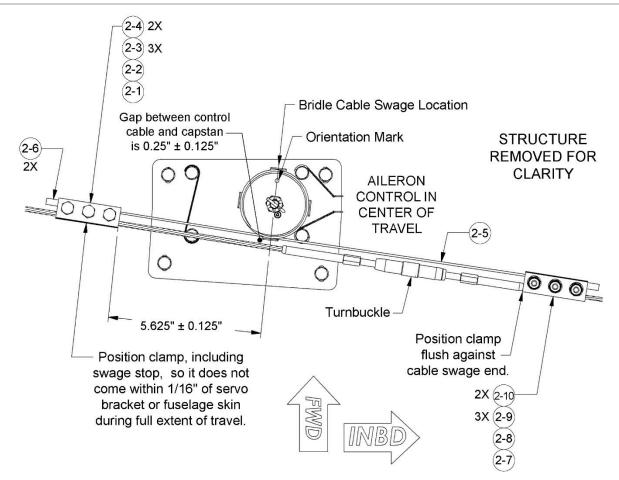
Installing Roll Servo Bridle Cable and Clamps – Inboard of Turnbuckle
